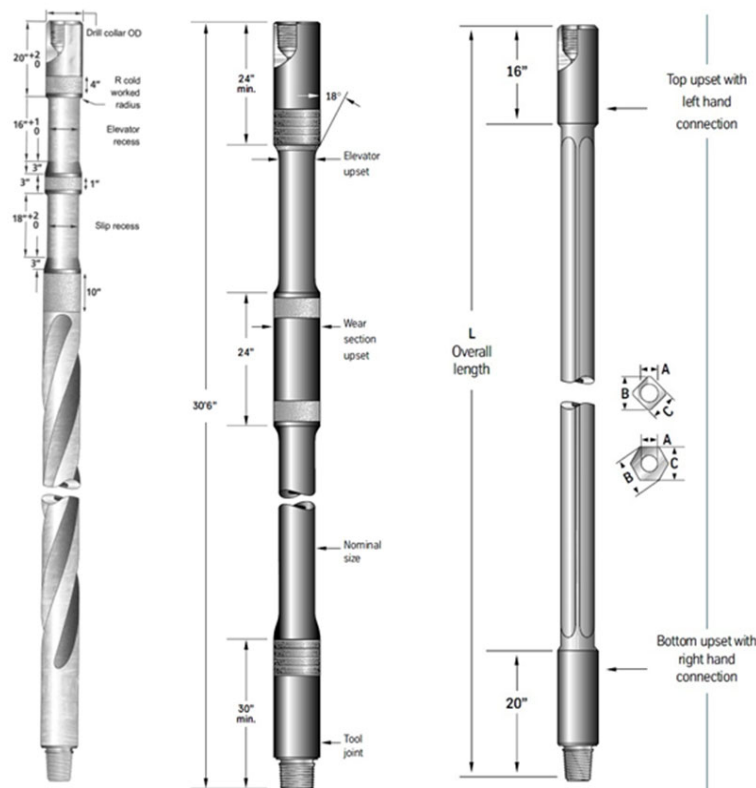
left: Spiral drill collar middle: heavyweight drill pipe with wear section; right: square or hexagonal kelly¹⁷, assembly sequence from bit to surface: collar, drill pipe, kelly.
